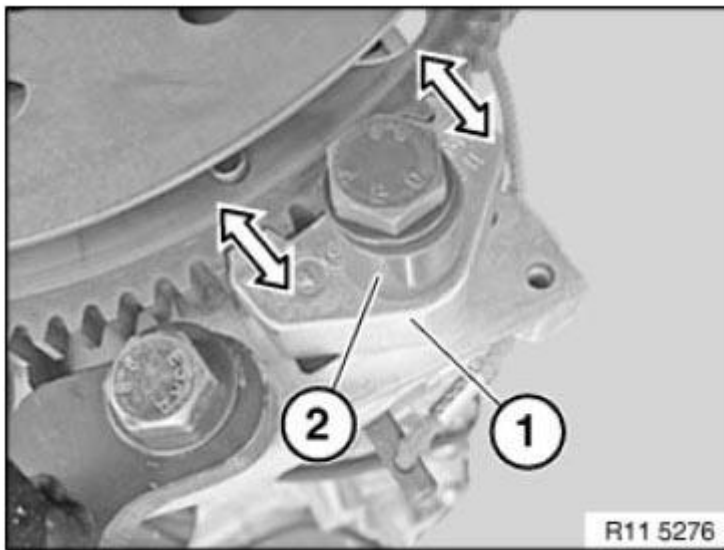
Securing Flywheel Using Special Tool 11 9 260/11 9 266
